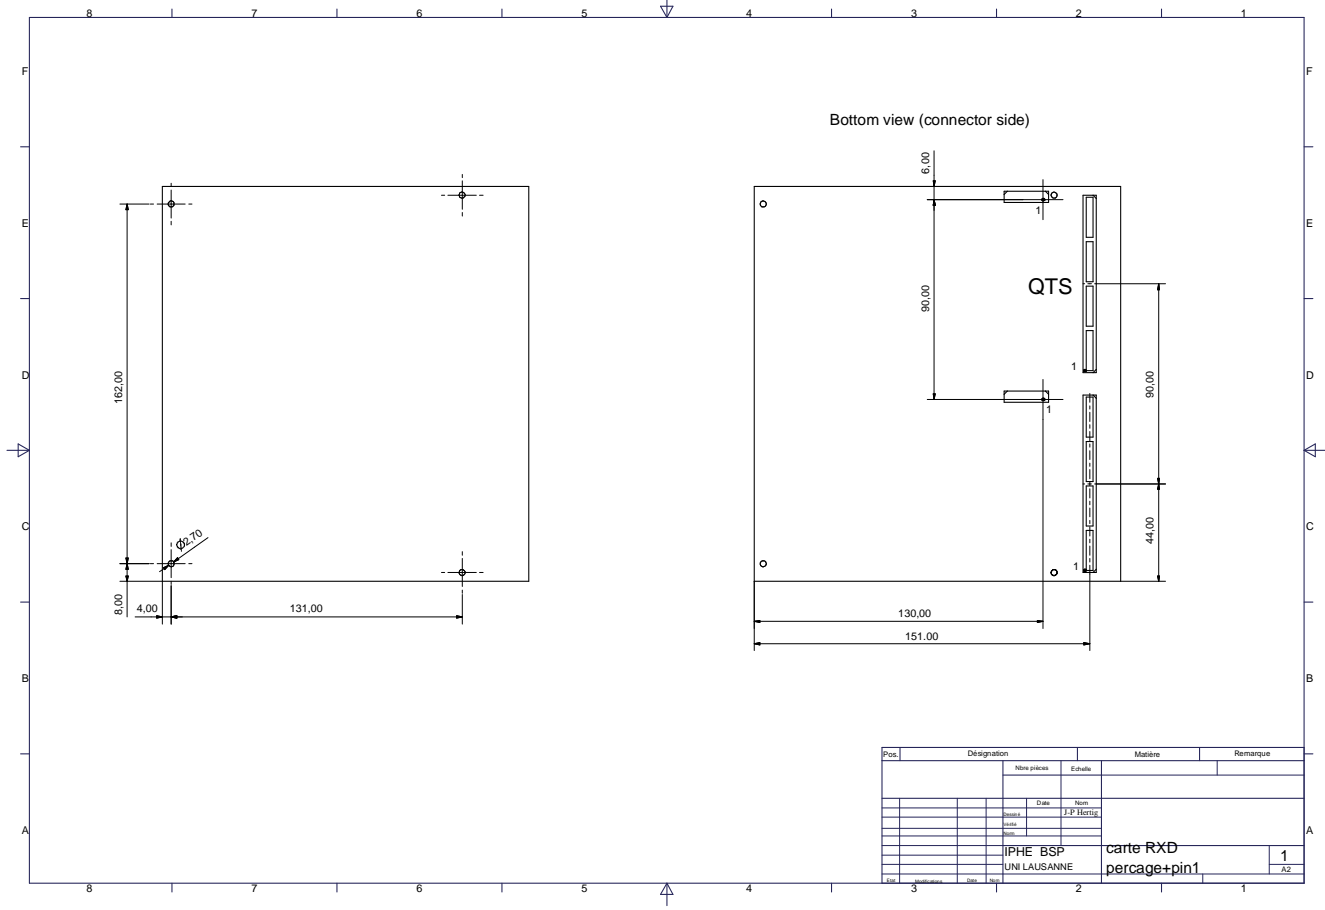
Mechanical dimension for the O-RxCard - TELL1 interface
